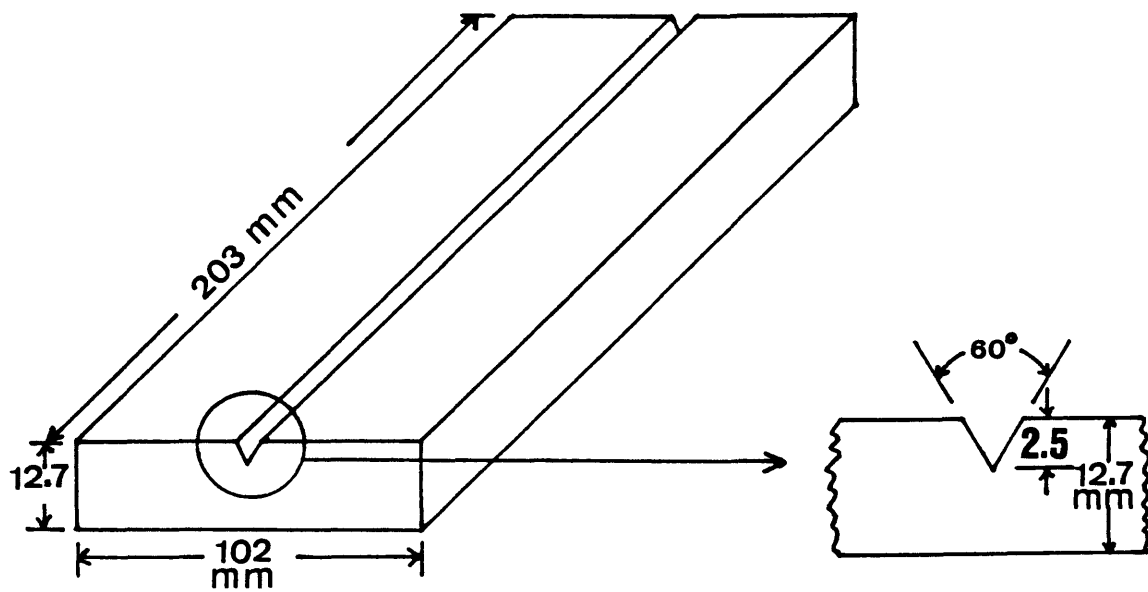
Joint geometry of the single-v-grooved welds for first and second pass.
